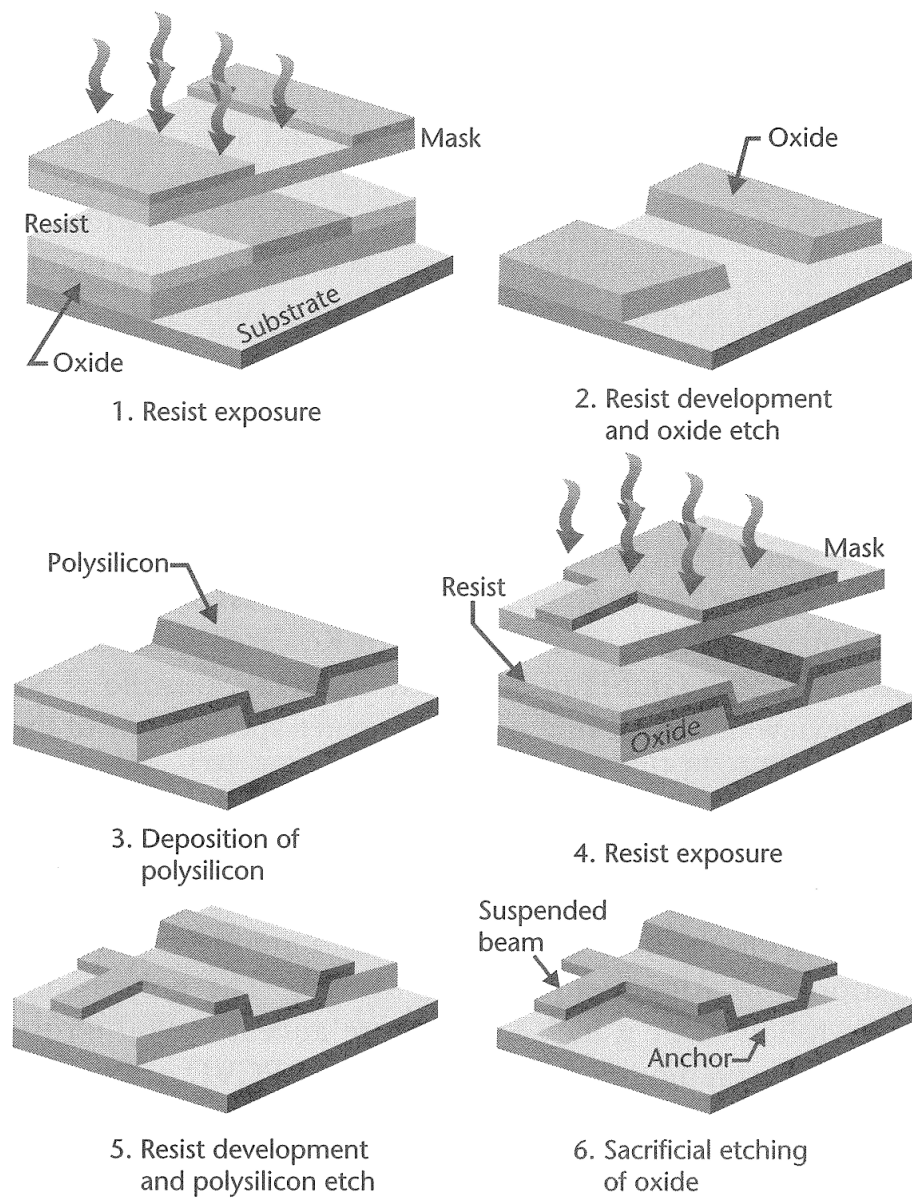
Schematic drawings of basic process steps in surface micromachining [40].
